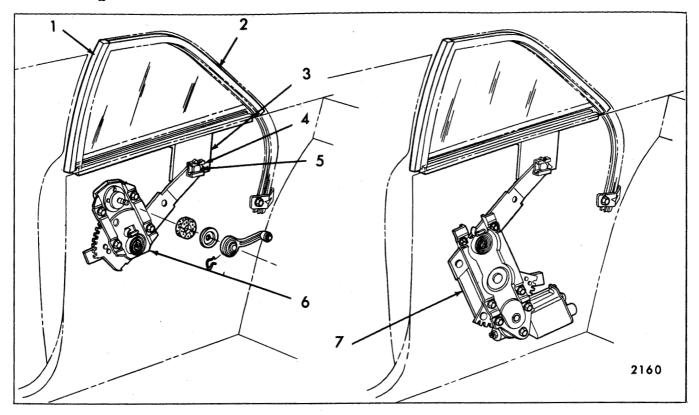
Rear Quarter Hardware - "A-11" Style
